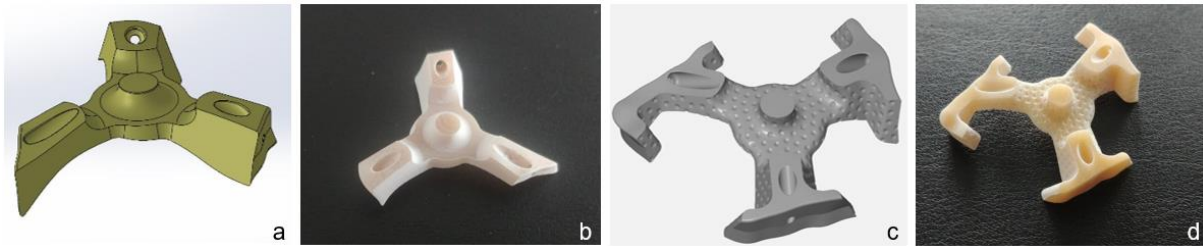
Bearing structure according to the old method: (a) Designed, (b) Manufactured; Bearing structure according to new the method: (c) Designed, (d) Manufactured
